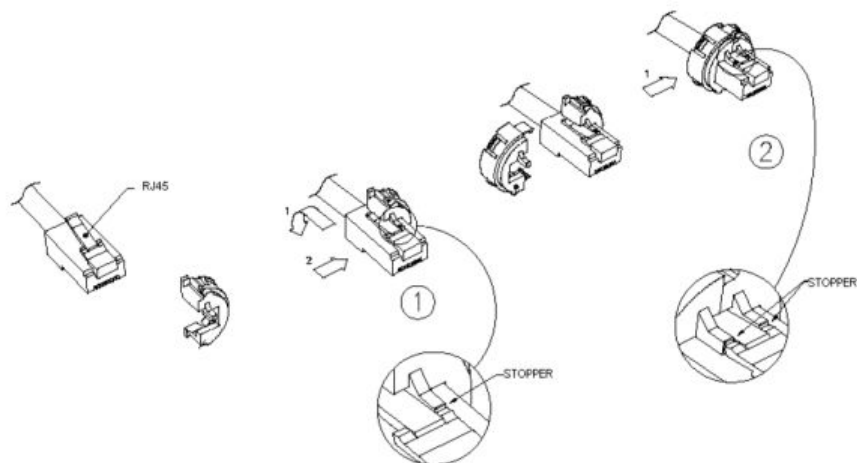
Assembling the RJ-45 connector housing – inside portion
